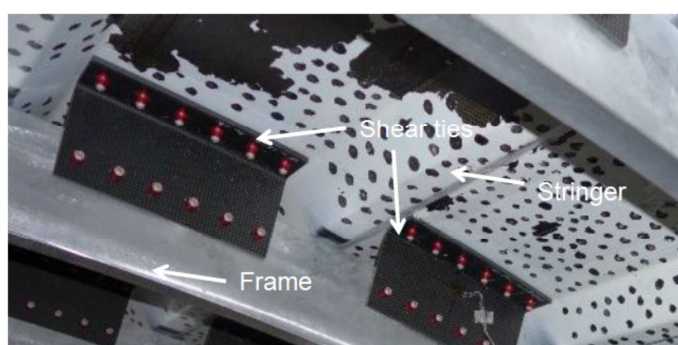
Panel components: Skin, assembled components (shear tie, frame, stringer)
